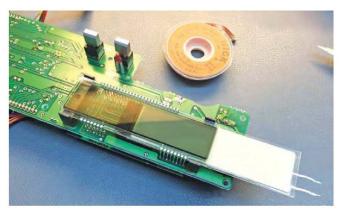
After unplugging the display board and removing the metal shield, you simply unsolder two leads and slide the original backlight panel out.
